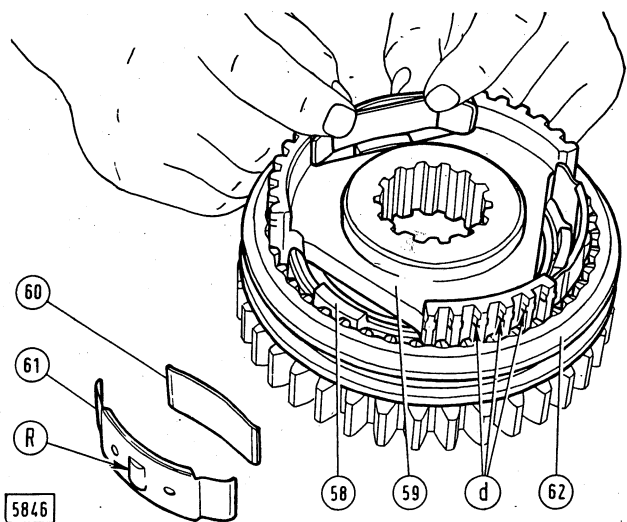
Fitting the synchromesh unit flat springs (60) and holders (61).
